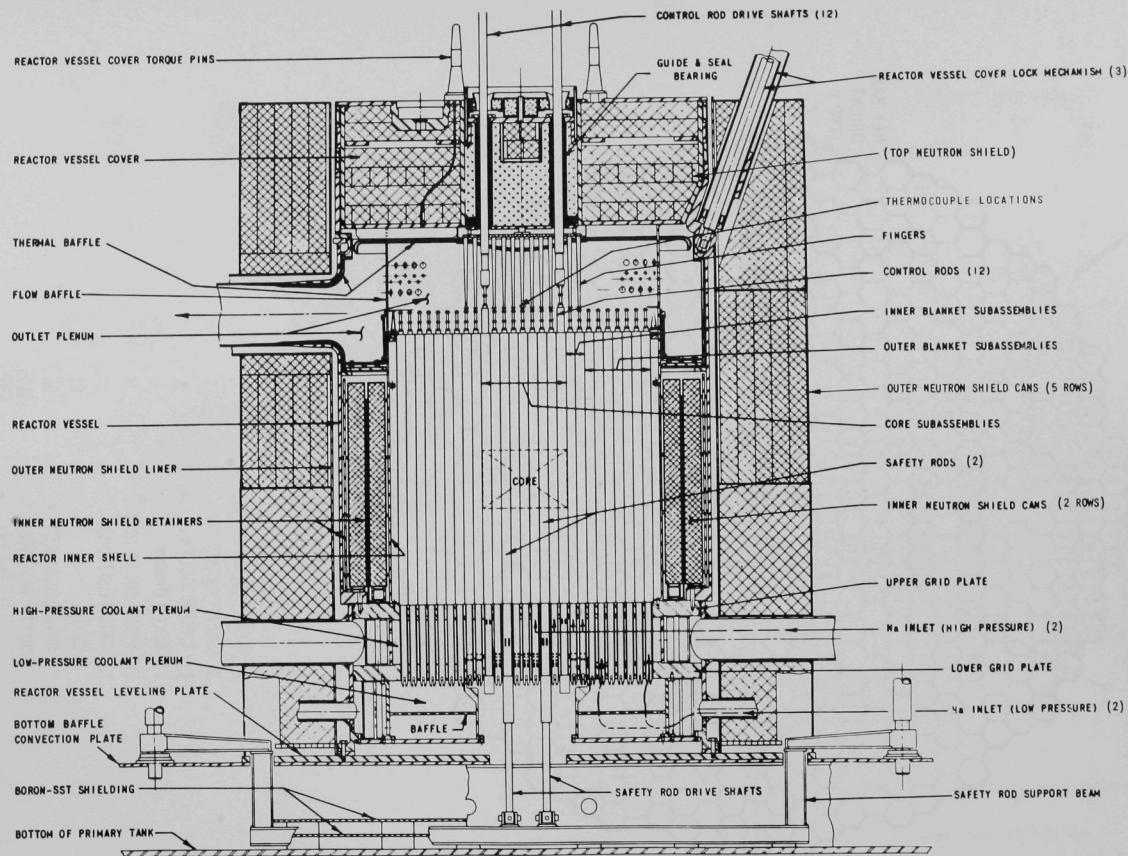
Reactor-vessel and Neutron-shield Assembly
